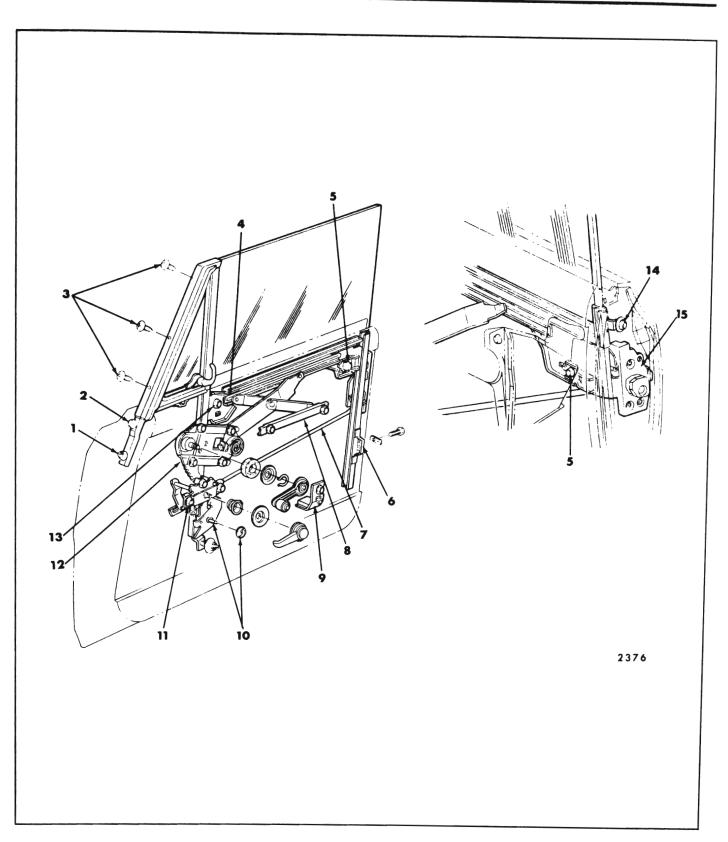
Front Door Hardware - "X-37" Styles
